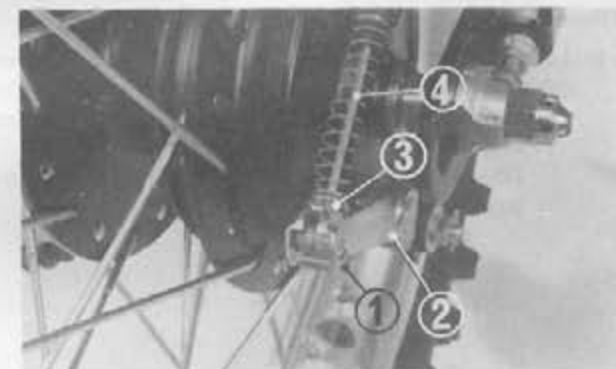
(1) Cotter pin (2) Brake arm (3) Cap (4) Brake cable
